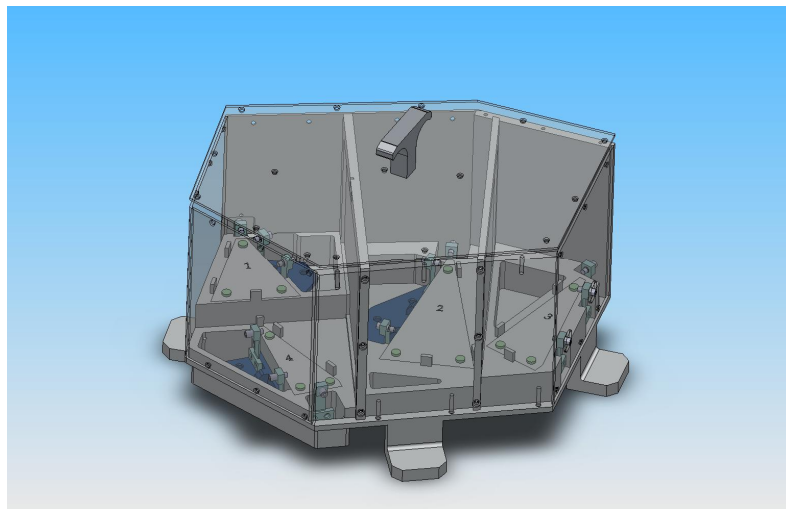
Cutaway of the prism mounting assembly, shown without prisms installed.
